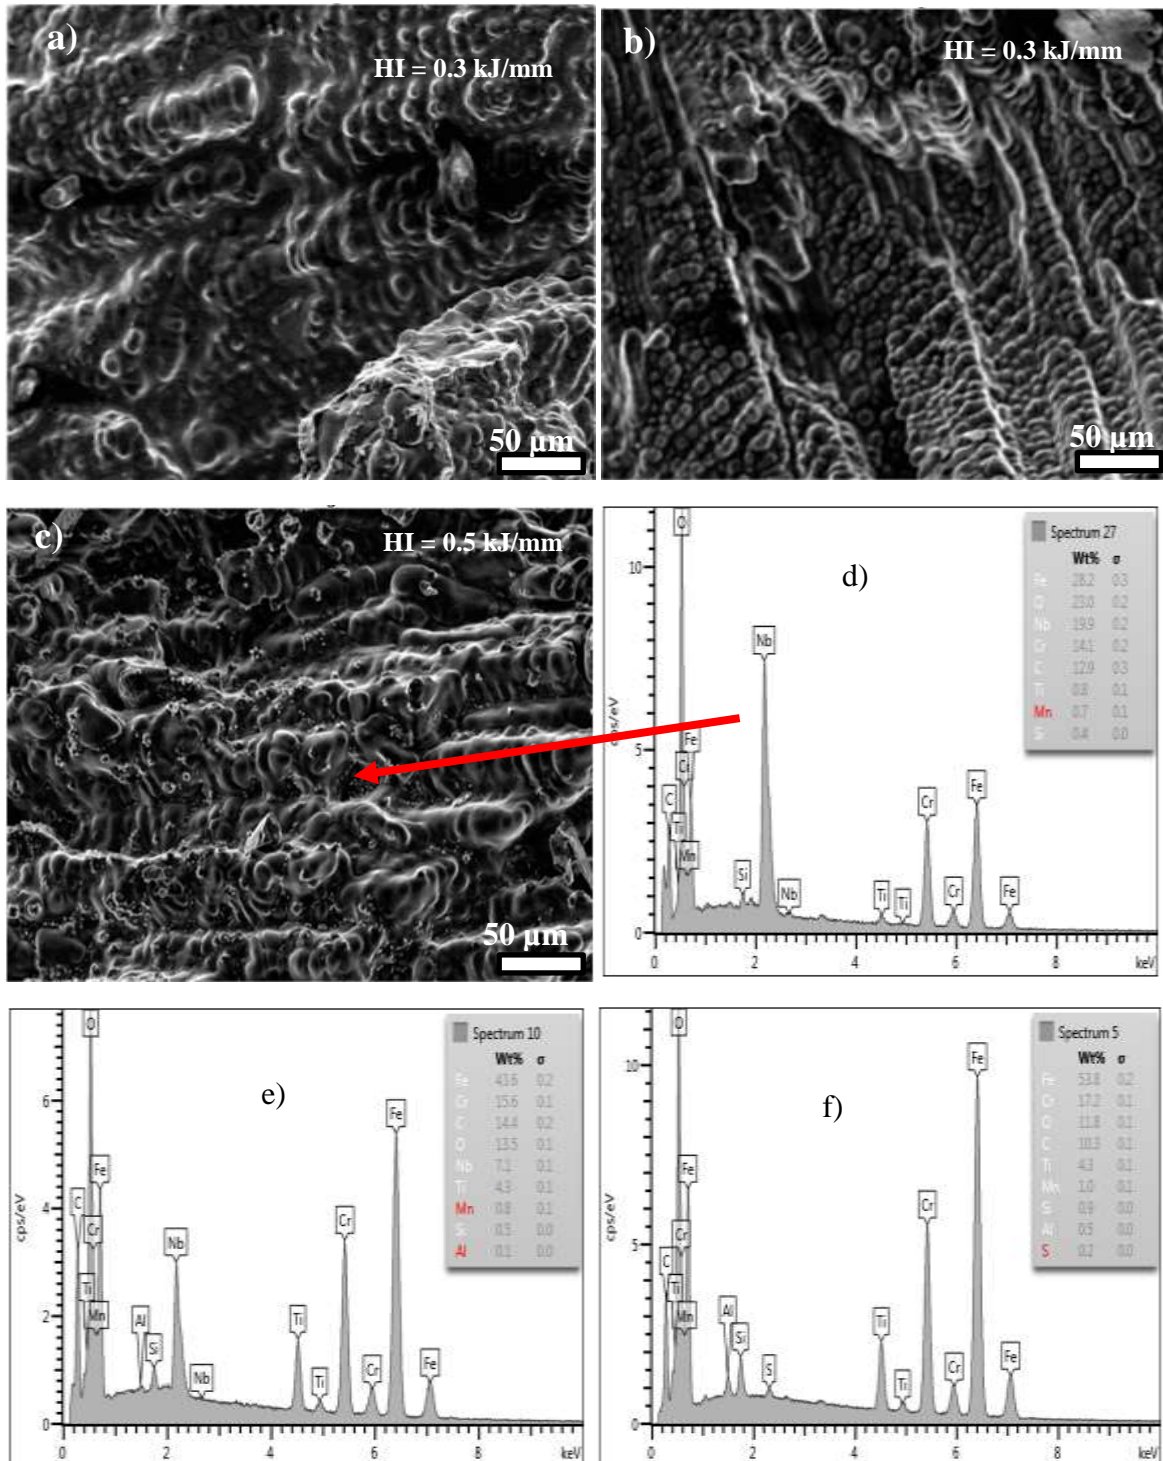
Secondary electron image of solidification cracking morphology of a) D:0.4Ti + 0.6Nb - stabilized ferritic stainless steel showing high fraction eutectic during welding speed 6 mm/s b) B:0.7Ti - stabilized ferritic stainless steel showing low fraction eutectic during welding speed 6 mm/s and c) C:0.6Nb - stabilized ferritic stainless steel during welding speed 3 mm/s d) EDX spectra of the precipitates in C:0.6Nb - stabilized ferritic stainless steel fracture surface at a welding speed of 3 mm/s e) EDX spectra of the precipitates in D:0.4Ti + 0.6Nb - stabilized ferritic stainless steel fracture surface at a welding speed of 3 mm/s f) EDX spectra of the precipitates in B:0.7Ti - stabilized ferritic stainless steel fracture surface at a welding speed of 6 mm/s
